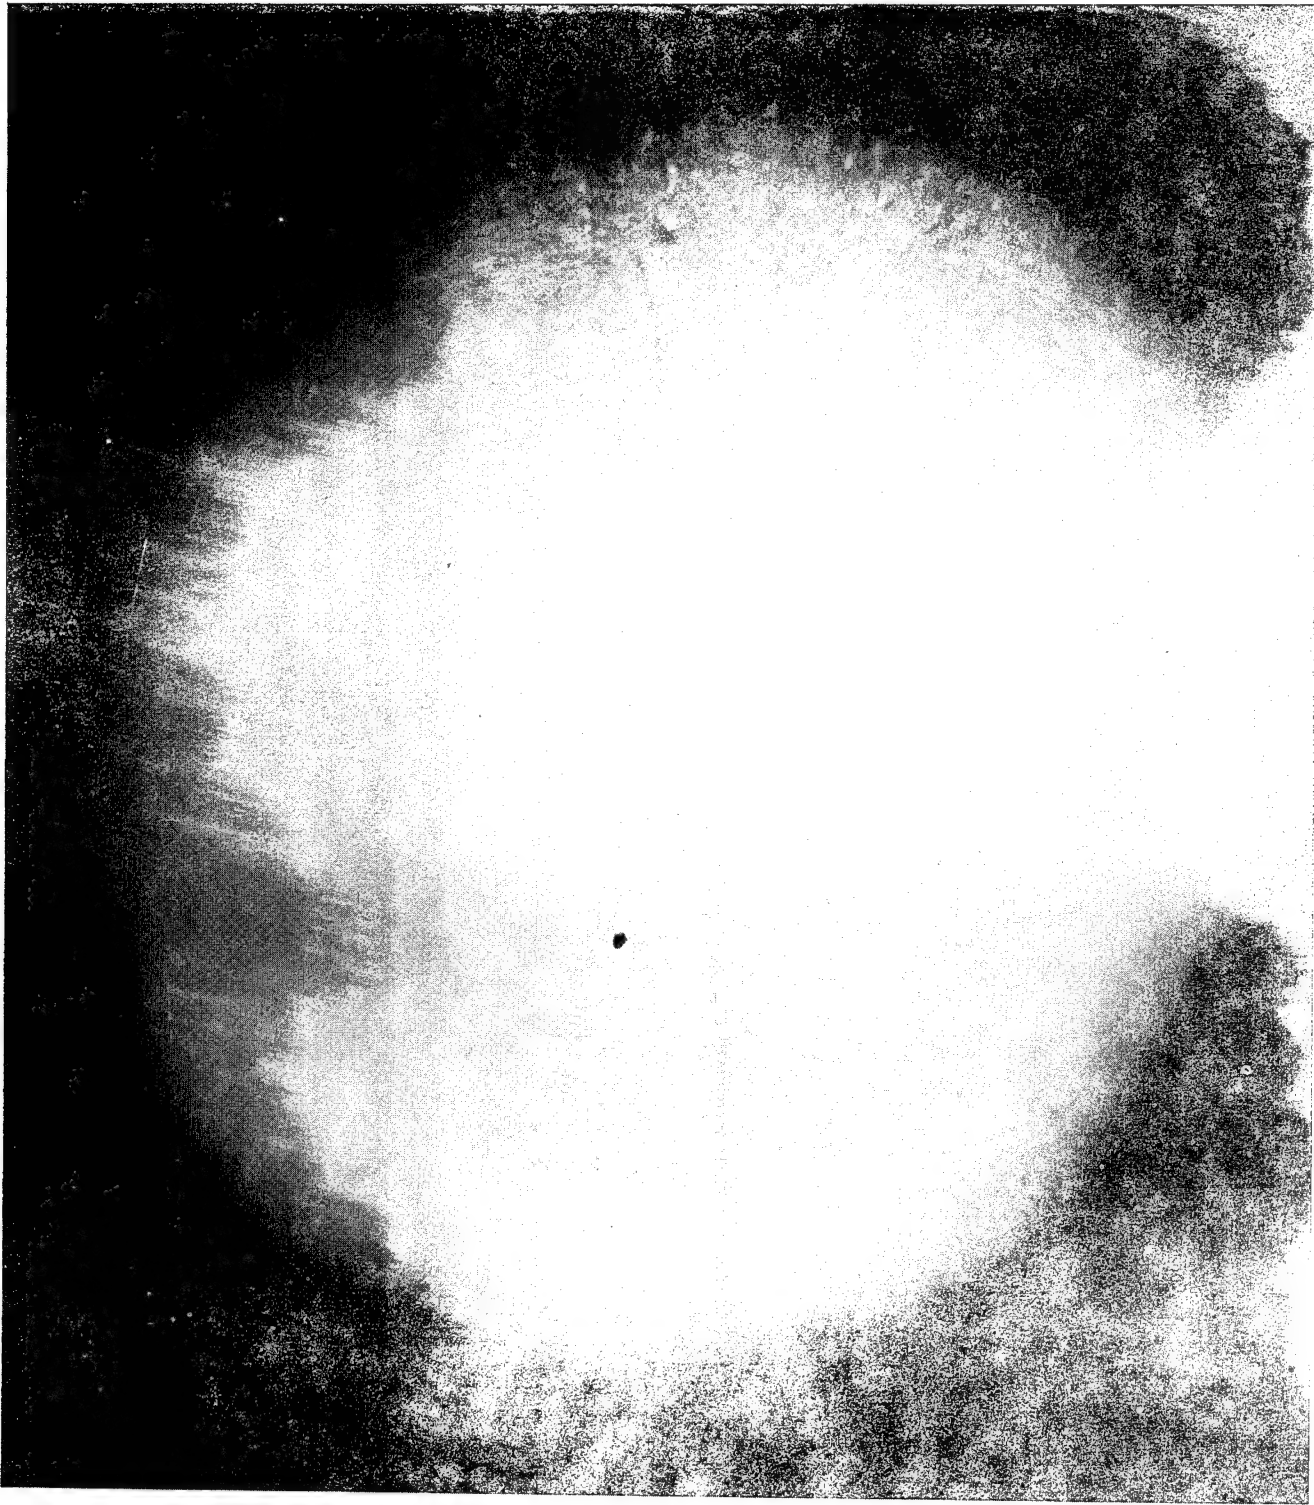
38 X OPTICAL VIEW OF ROOT CRACK IN TURBINE DISC.
